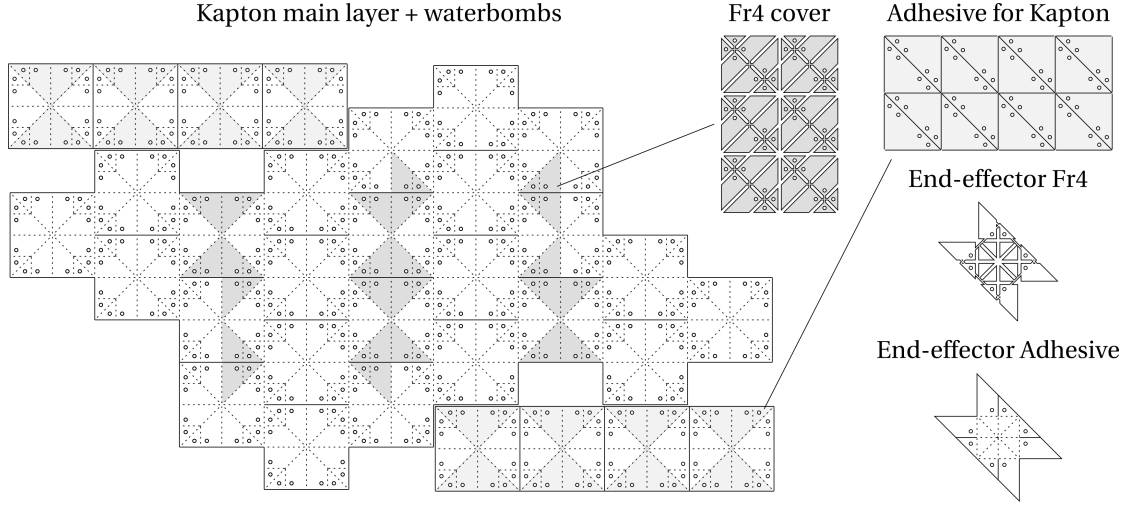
F-VSA CAD design. This design consists of five elements. First, the Kapton main layer coated with adhesive is cut, aligned with the FR4 cover, heat-pressed, and FR4 bridges are removed. This layer is folded and heat-pressed to create a grid-like origami. Next, extra Kapton waterbombs patterns are folded, coated with a layer of adhesive, inserted into the interstices of the main structure, and fixed using heat-pressing. The end-effector consists of a waterbomb Kapton layer coated with adhesive and attached with FR4. The latter is then inserted into the central square of the main structure grid and fixed using heat-press or screws.
